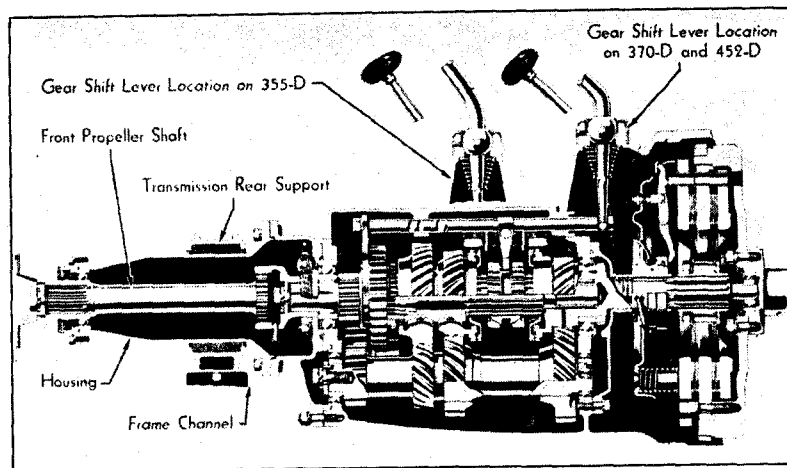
Sectional view of transmission showing the front propeller shaft and housing
